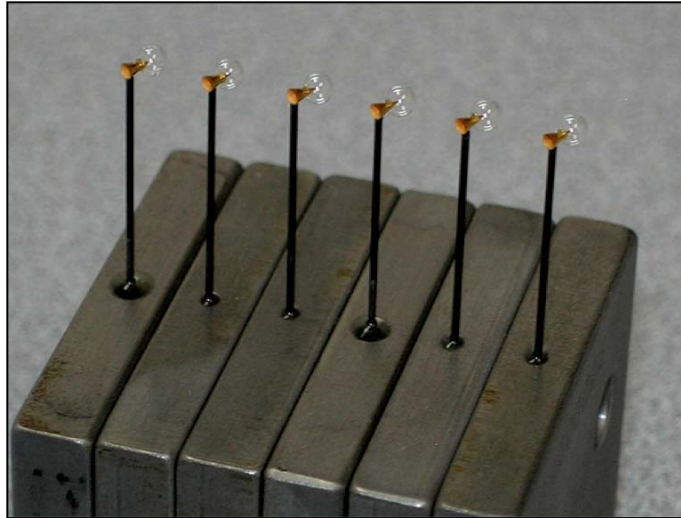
Cone-in-shell targets, assembled by GA's automated target assembly system.
